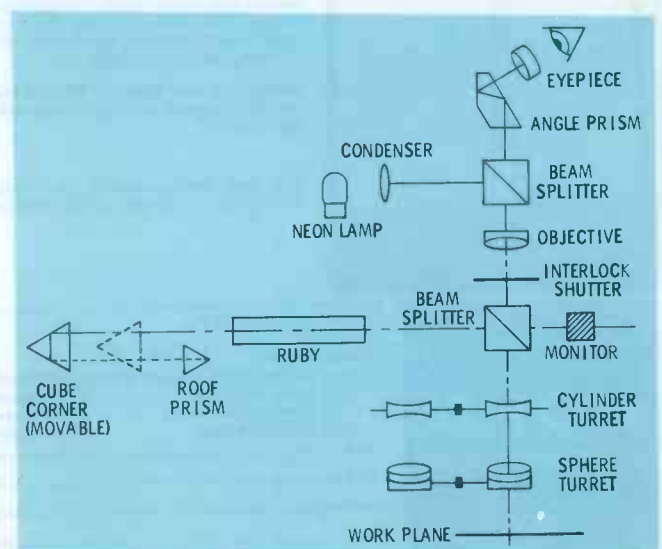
Diagram of a welding system that uses a laser.
